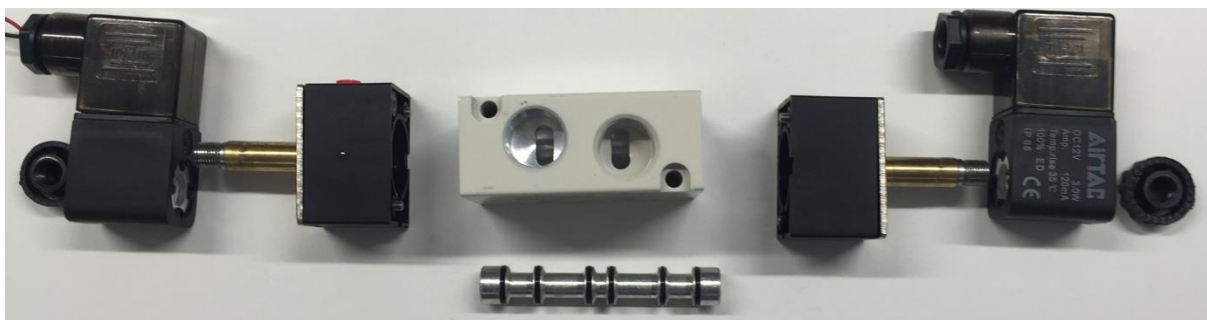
, Generic pneumatic electrical actuation valve explosion (Grindley, 2014)
